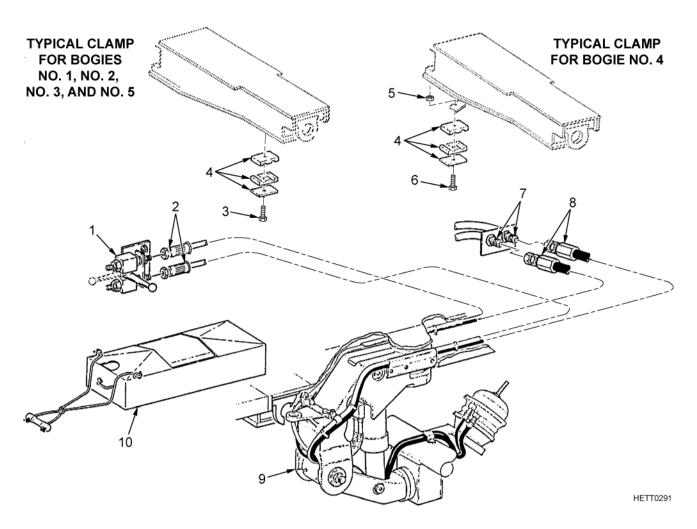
Block Clamp from Hydraulic Hoses Removal.
